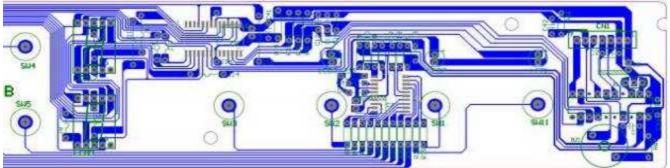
4 - PCB layout of Control PCB for model C74E-BBCC02
